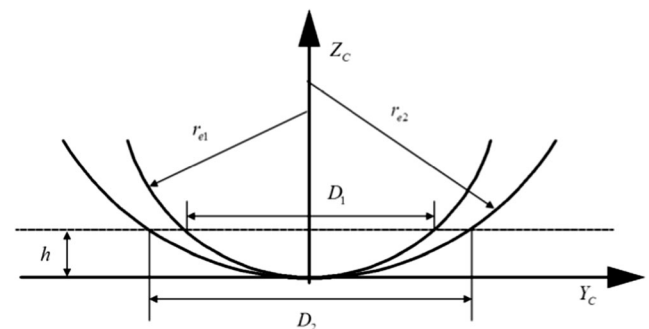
The equivalent cutting edge of the fillet-end cutter
